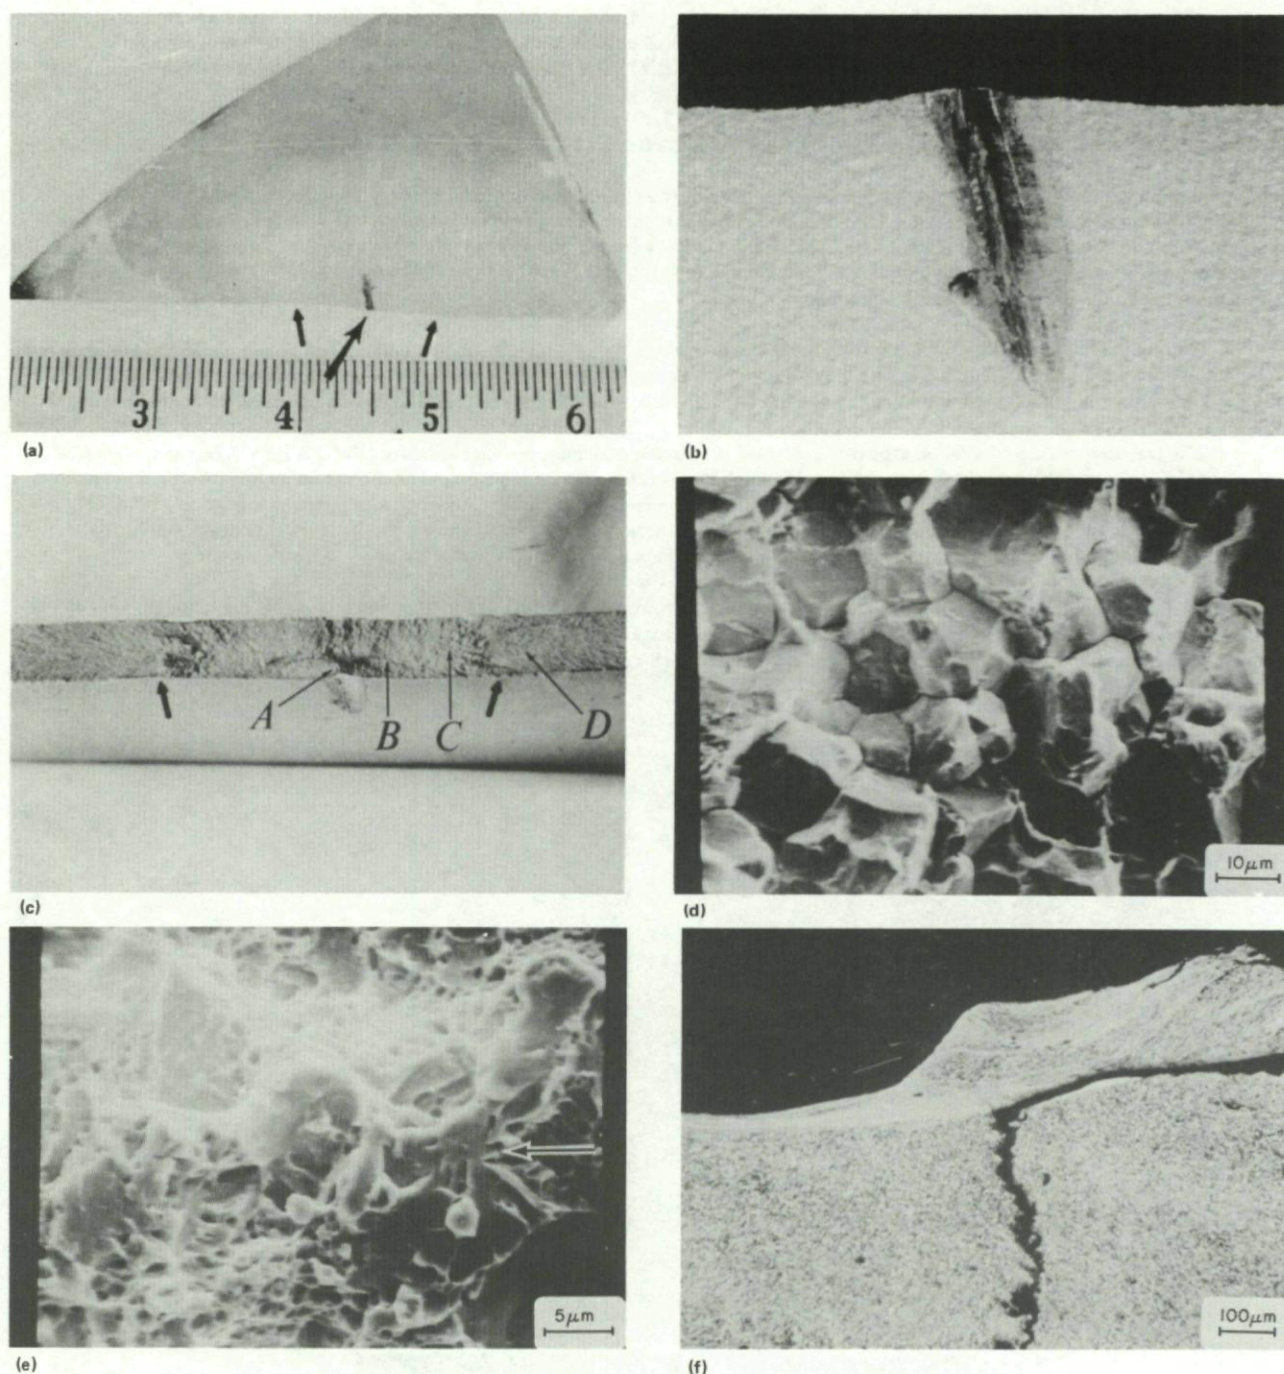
Failure of a 4340 steel landing gear cylinder
